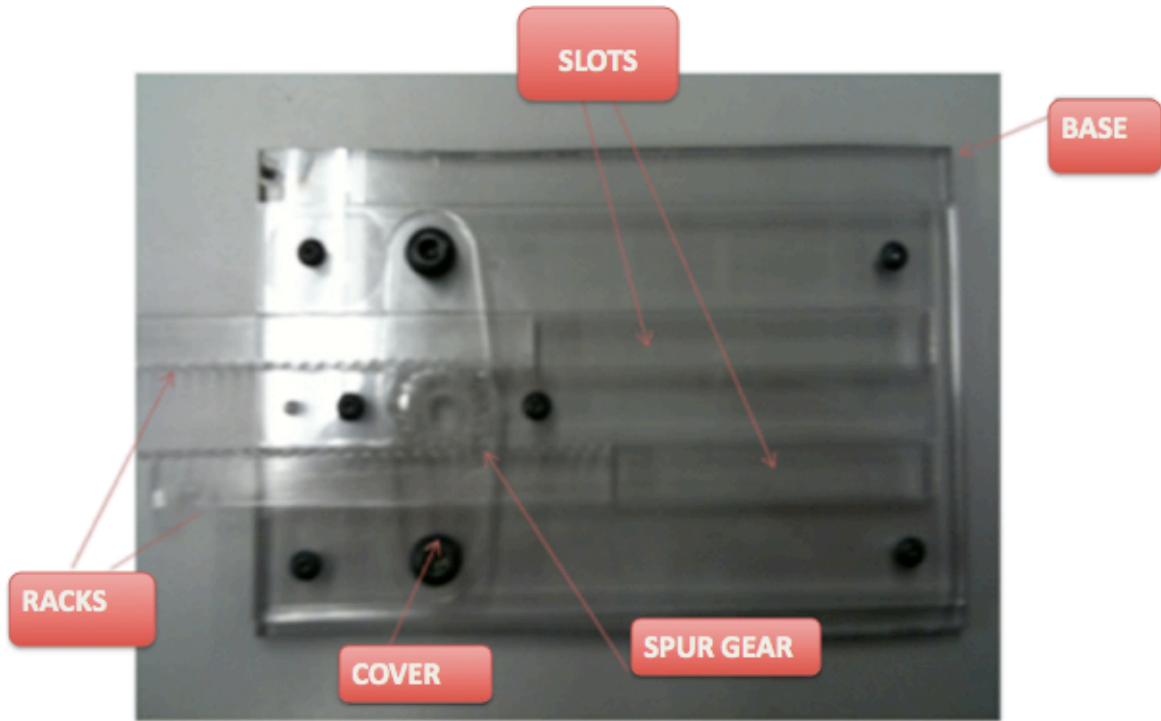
Rack and Pinion Assembly for the TEE interface used for the zeroth order prototype for the zeroth order prototype of the rocker handle cable system.
